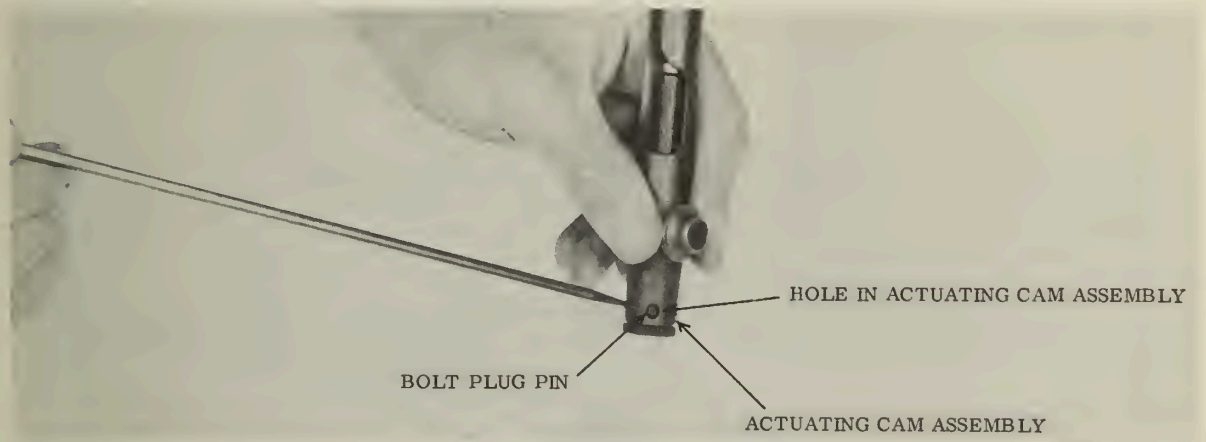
Removing/Replacing the Bolt Plug Pin.
